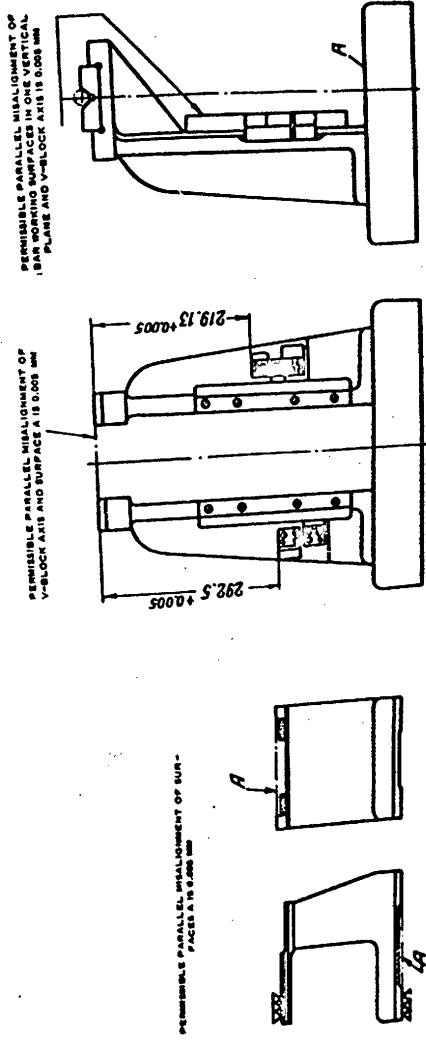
FIXTURE FOR CHECKING PARALLEL ALIGNMENT OF CONNECTING ROD BEARING HOLES
